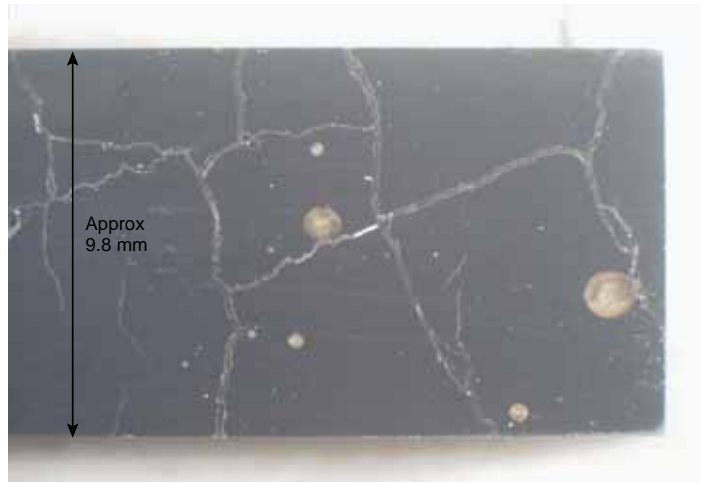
WeldoverlayA test sample showing the check cracks that have been filled with epoxy.
